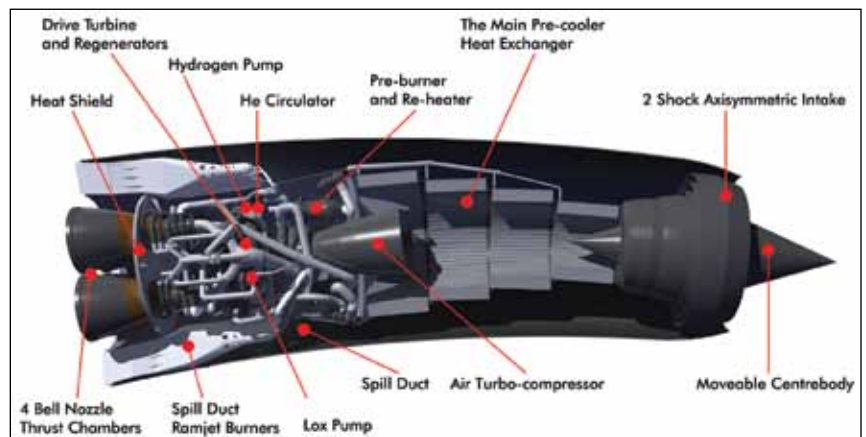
Parts of the SABRE engine. When the outside air becomes too thin for combustion, the engine switches from jet mode to rocket mode.
